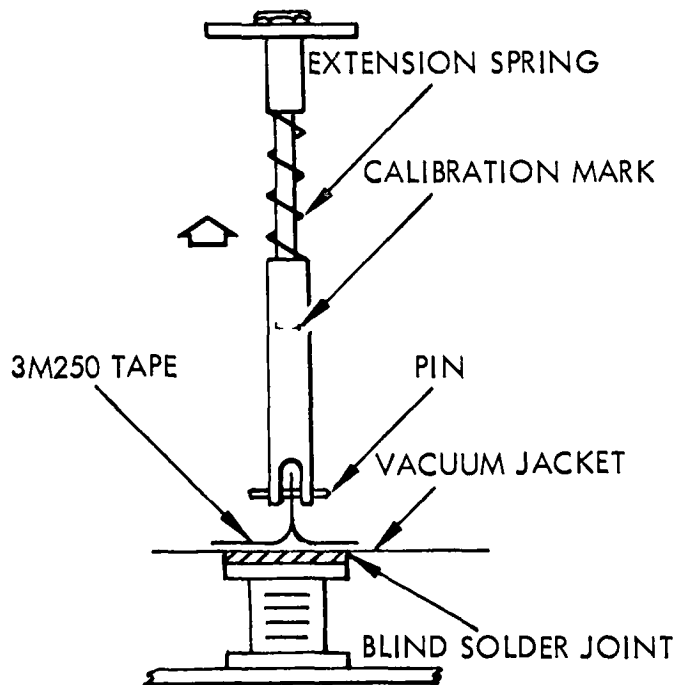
Inspection Method for Spring/Jacket Solder Joint
